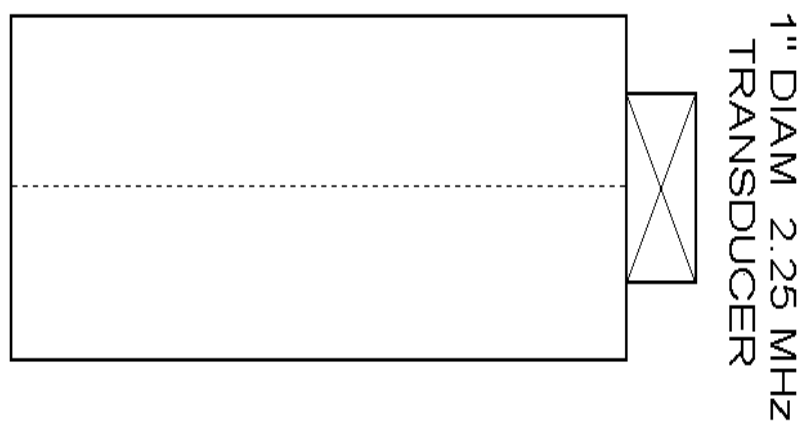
Longitudinal end scan inspection technique for large bar, rod and forgings.
